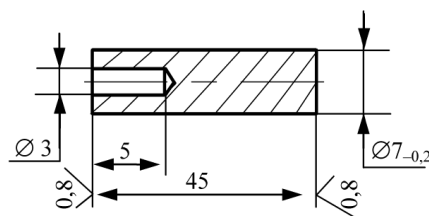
Outline drawing of the counter-piece to produce fretting corrosion damages
